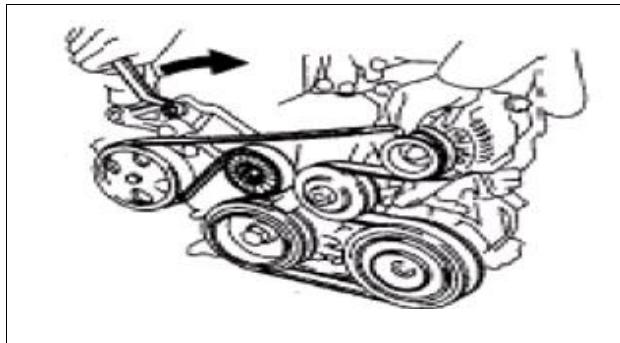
Remove the Alternator and the Water Pump Belt.
